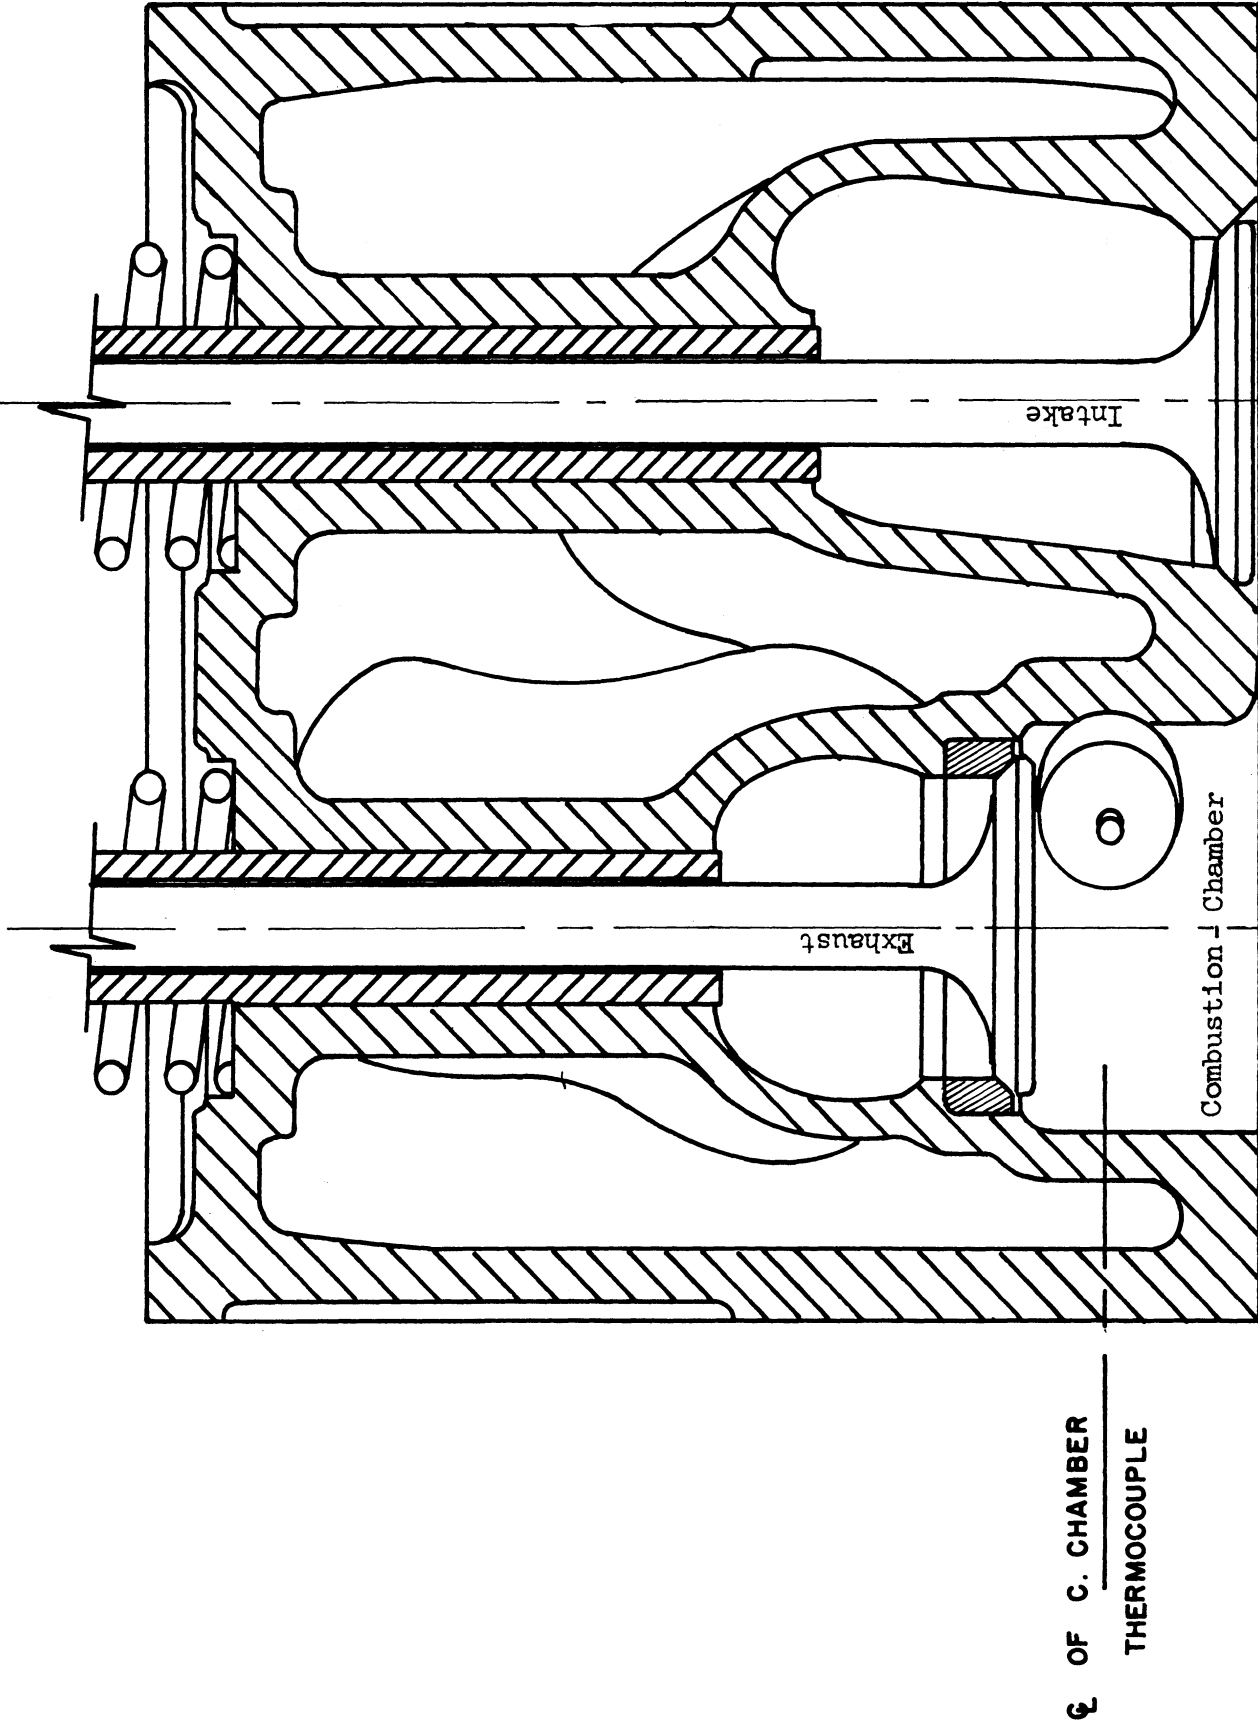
Sectional Elevation of Cylinder-Head Showing Position of Combustion-Chamber Thermocouple.
